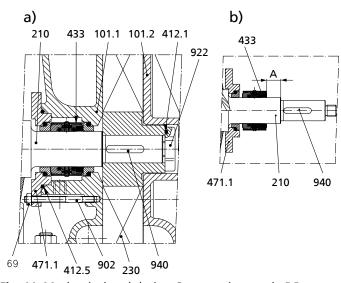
Mechanical seal design Q, operating mode DB a) Sectional drawing
